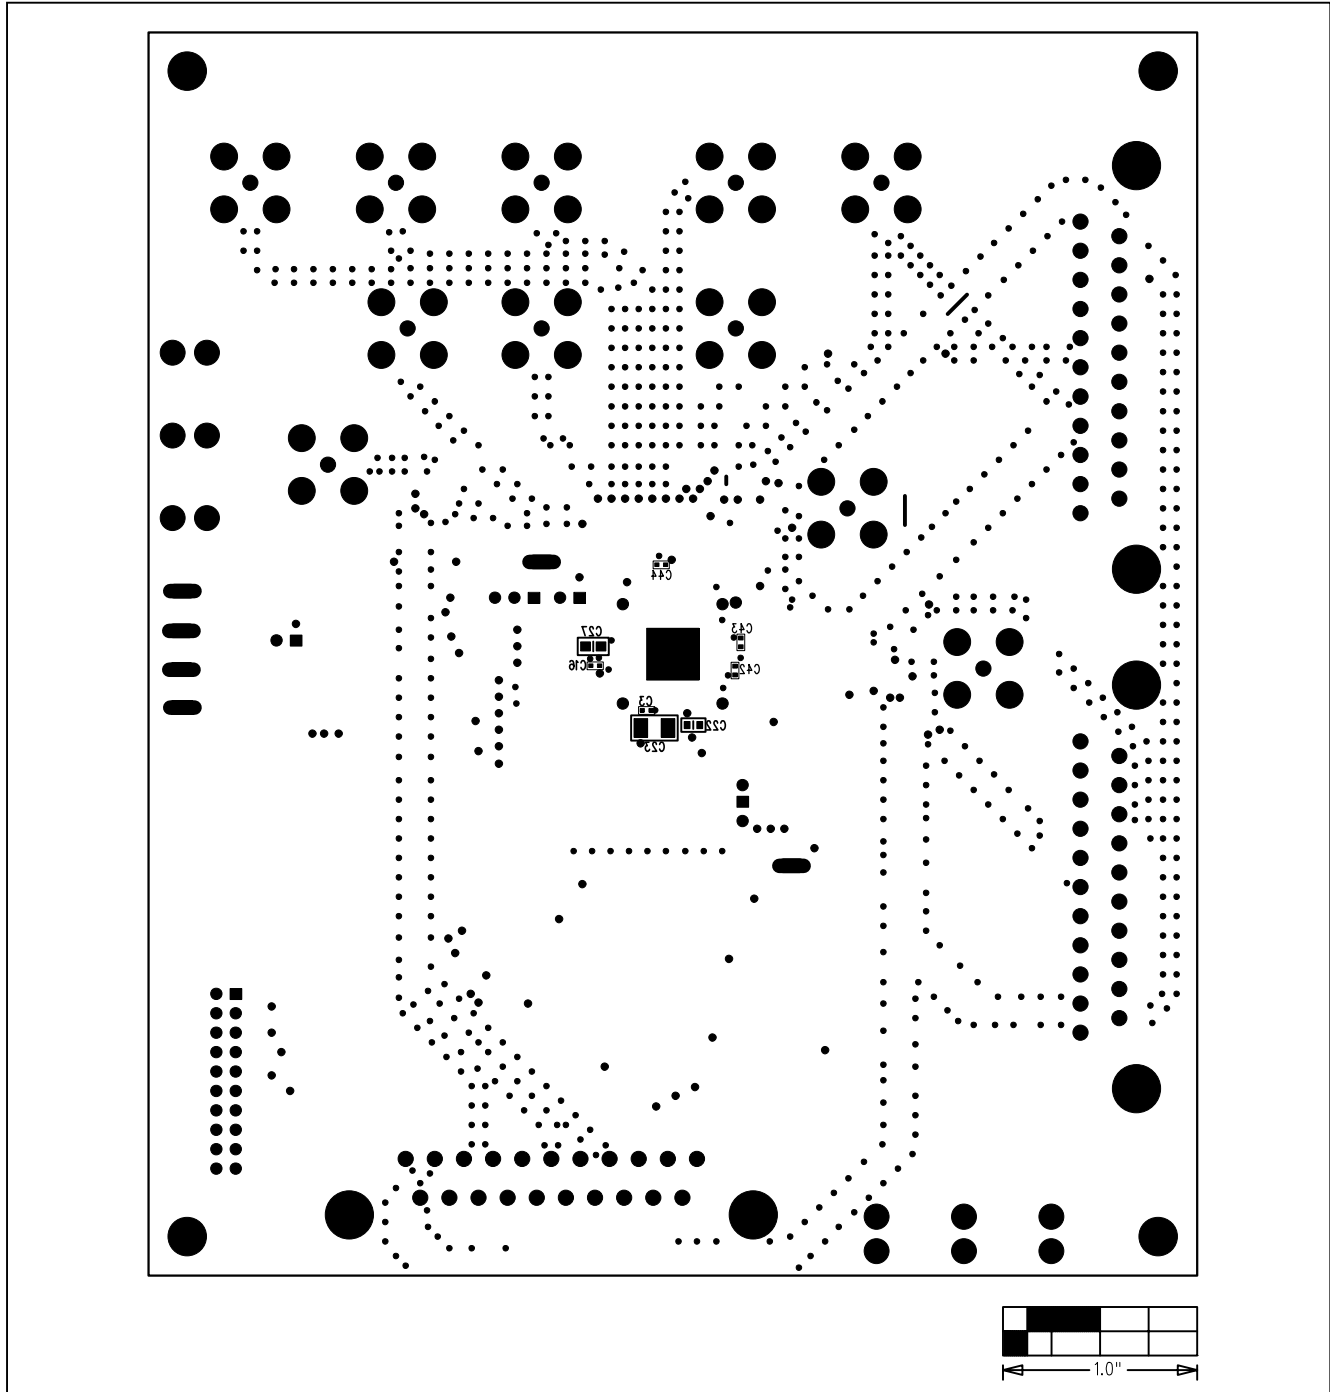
MAX4399 EV Kit Component Placement Guide—Solder Side
